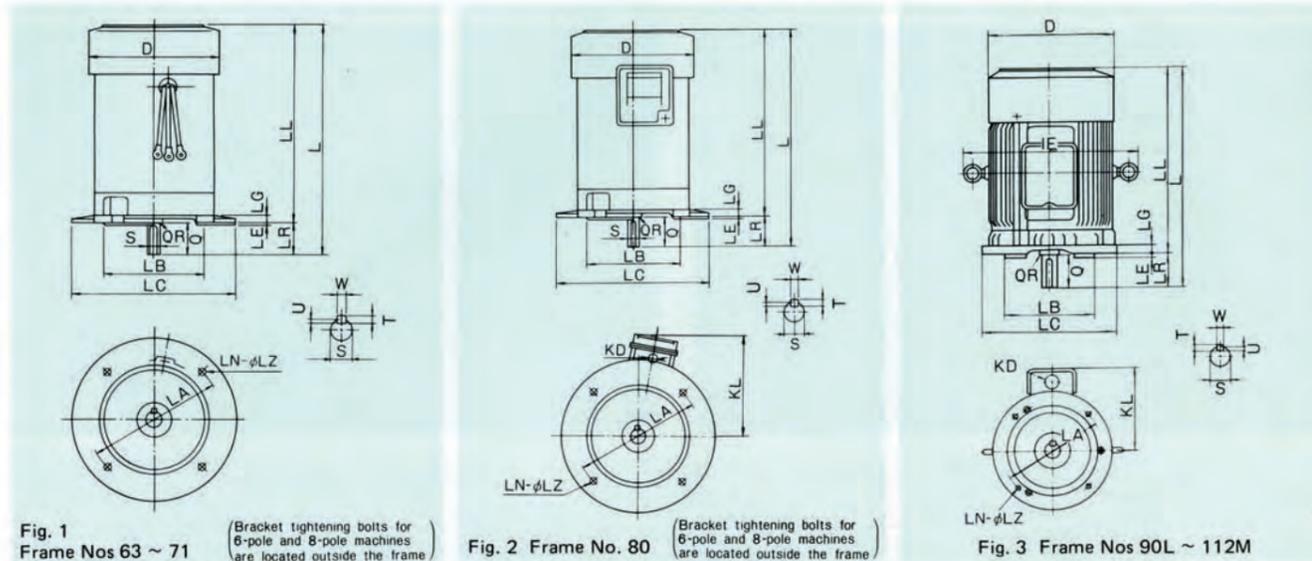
Frame Nos 63 ~ 71 (Bracket tightening bolts for 6-pole and 8-pole machines are located outside the frame)
